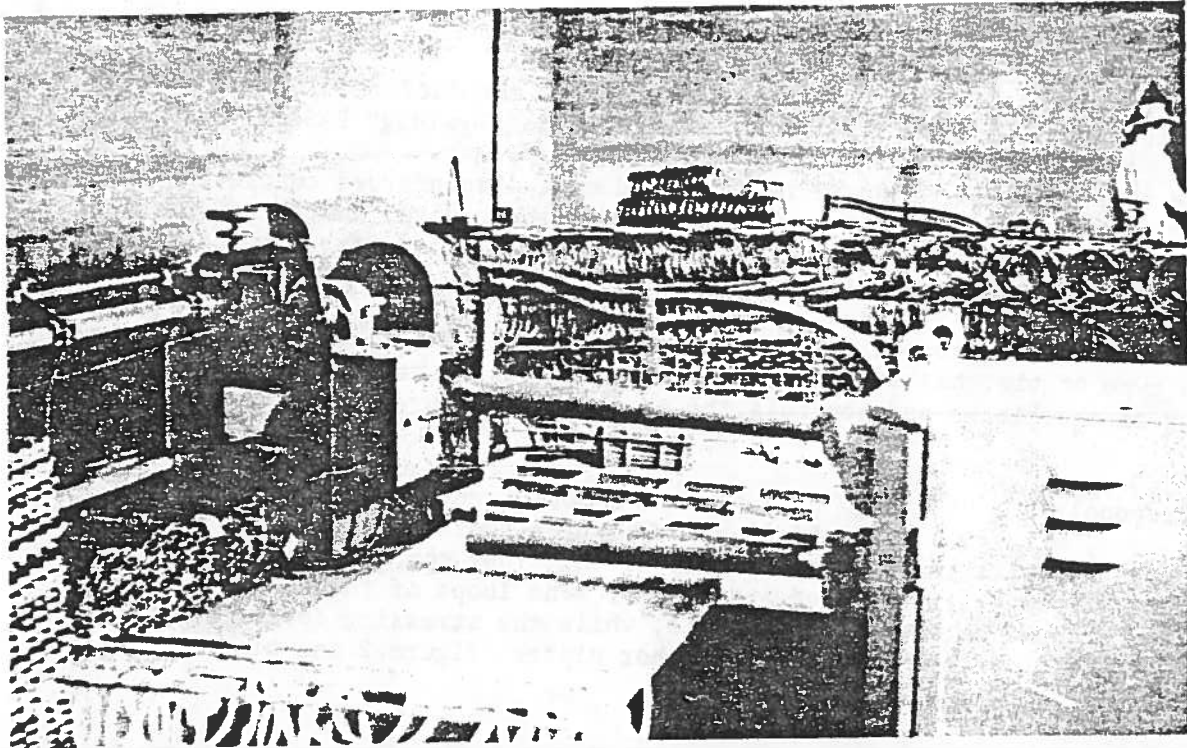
BLOCK-REINFORCEMENT MANUFACTURING PLANT
